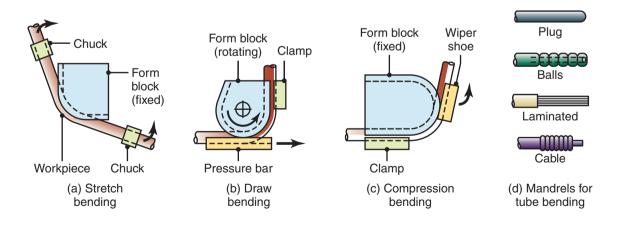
Methods of bending tubes. Internal mandrels or filling of tubes with particulate materials, such as sand, are often necessary to prevent collapse of the tubes during bending. Tubes also can be bent by a technique in which a stiff, helical tension spring is slipped over the tube. The clearance between the outer diameter of the tube and the inner diameter of the spring is small; thus, the tube cannot kink and the bend is uniform.
